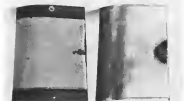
Blade cracks produced by thermal fatigue machine. Blade left, is Inconel X.
